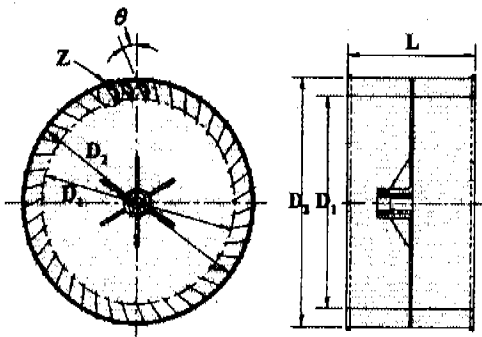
Geometry configuration of double inlet Sirocco impeller.
